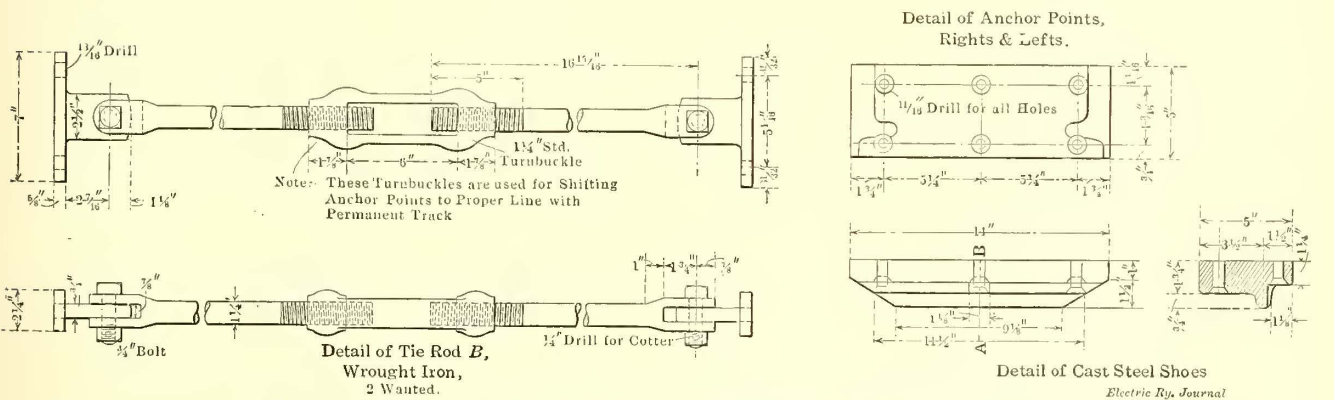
Details of Tie Rod "B," Anchor Points and Cast Steel Shoes
